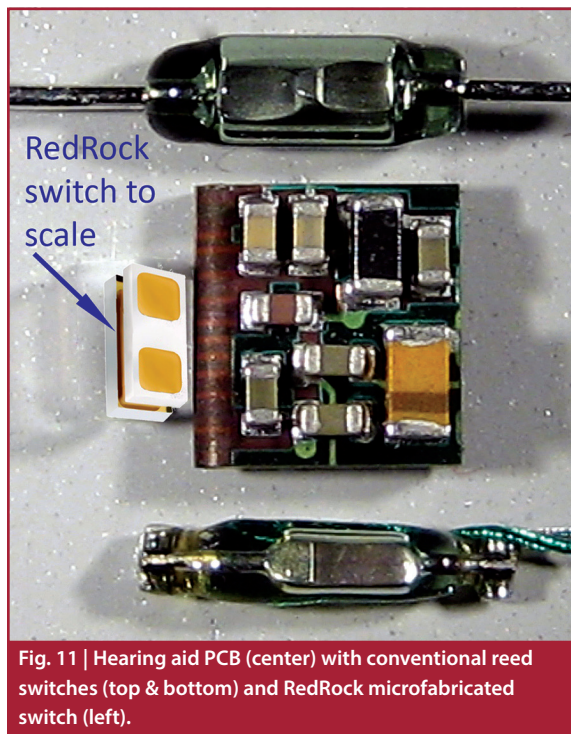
| Hearing aid PCB (center) with conventional reed switches (top & bottom) and RedRock microfabricated switch (left).
